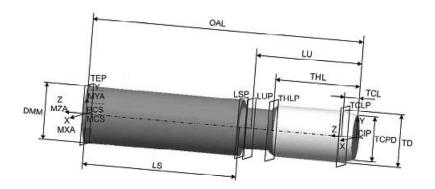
Thread-cutting tap with reinforced shank — Complete
